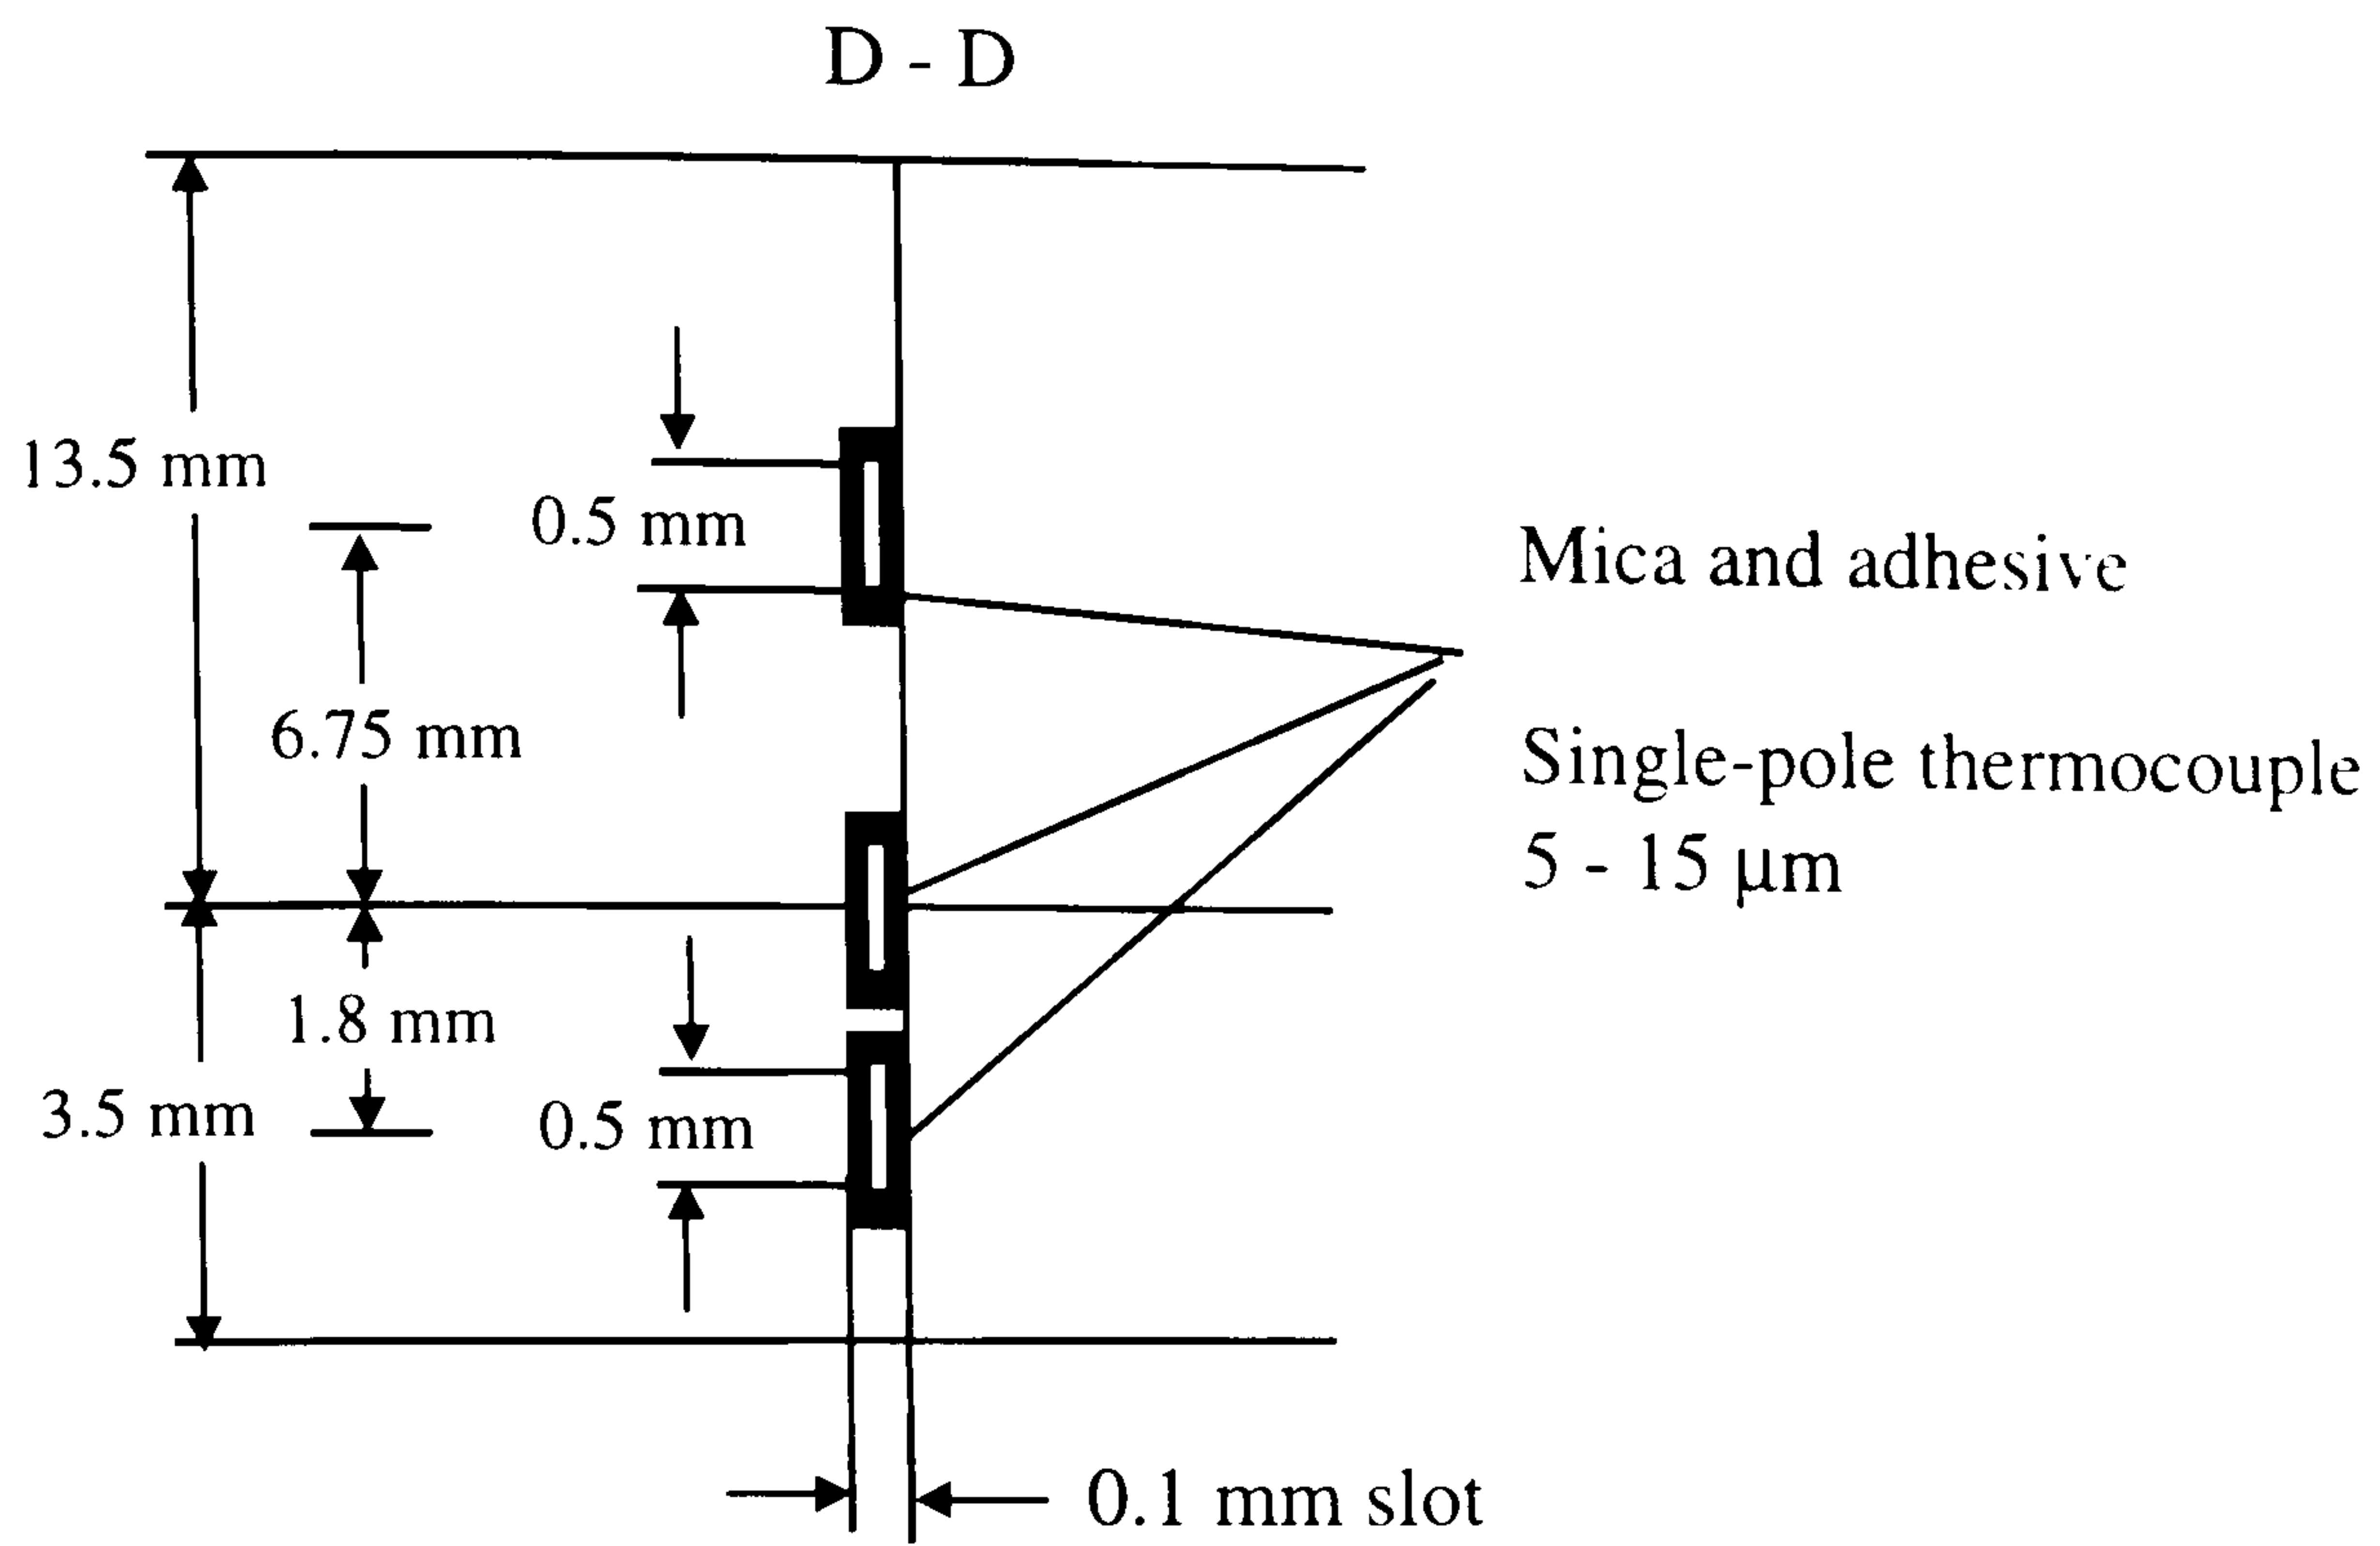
(b) The junction of thermocouple on the workpiece surface
